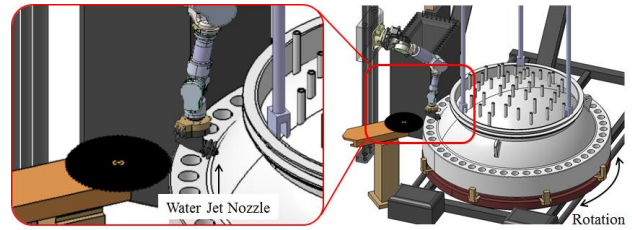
Water jet cutting for the hemispheric surface of the reactor pressure vessel head.
